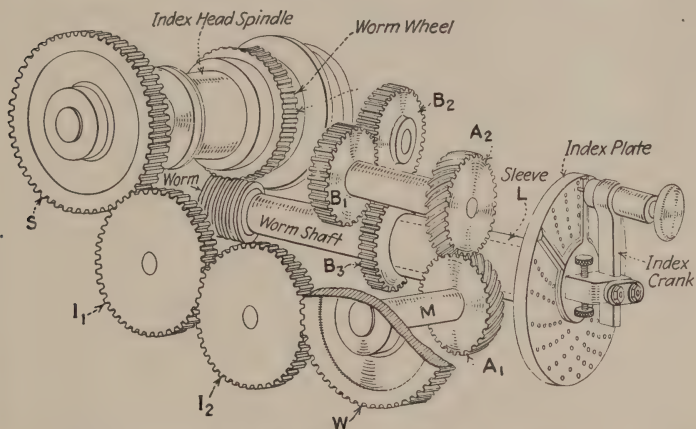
Illustrates the gearing for differential indexing with Brown & Sharpe index head (extended for clearness). In practice one idler, or two idlers, or a compound of any two of the change gears with or without an idler, may be used between the gears *S* and *W*.
